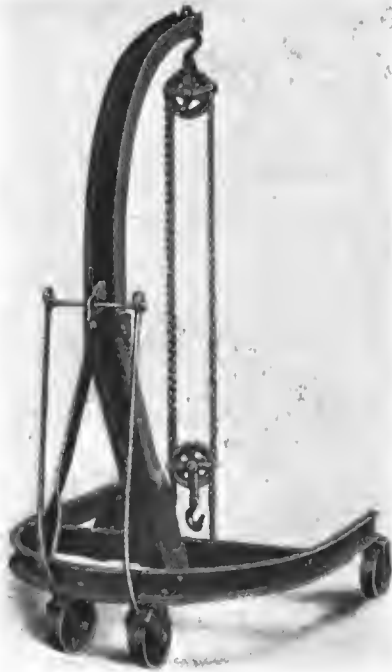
Portable pulley block crane, made by Cammeron Engineering Company, used in shops for handling motors, etc.
